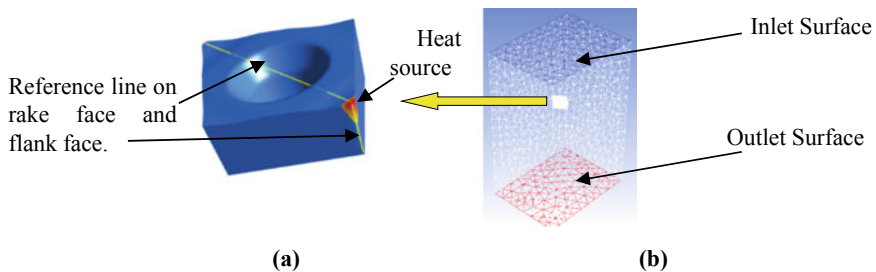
a CAD geometry of tool insert, b Enclosure creation around tool insert
